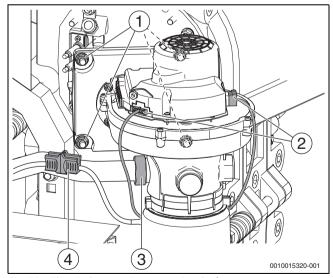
Electrical connections, removing the fan (boiler rating 75-100 kW)
